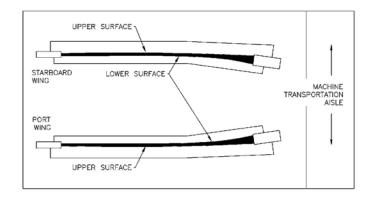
A380 Wing Box as Oriented in Assembly Jig - Plan View
